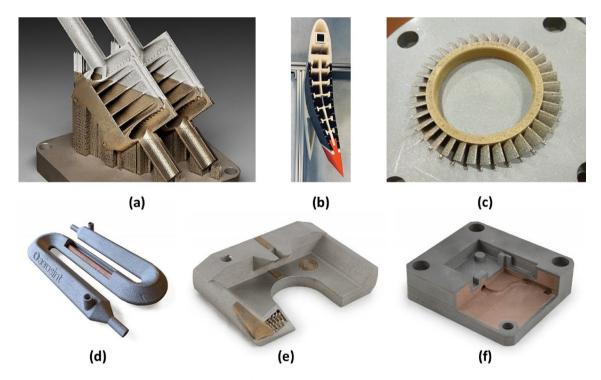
(a) Aerospace heat exchanger AM using stainless steel SS 316 and Inconel 718 (Image copyright: Netherlands Aerospace Centre). (b) MMAM wing section inspired by fishbone to adjust wing curvature [244]. (c) MMAM aircraft engine disk fabricated using 316L stainless steel and Cu10Sn materials [245]. (d-f) Dual-metal components fabricated using copper on Aerosint recoater metal 3D printer, photo by Aerosint [246].
